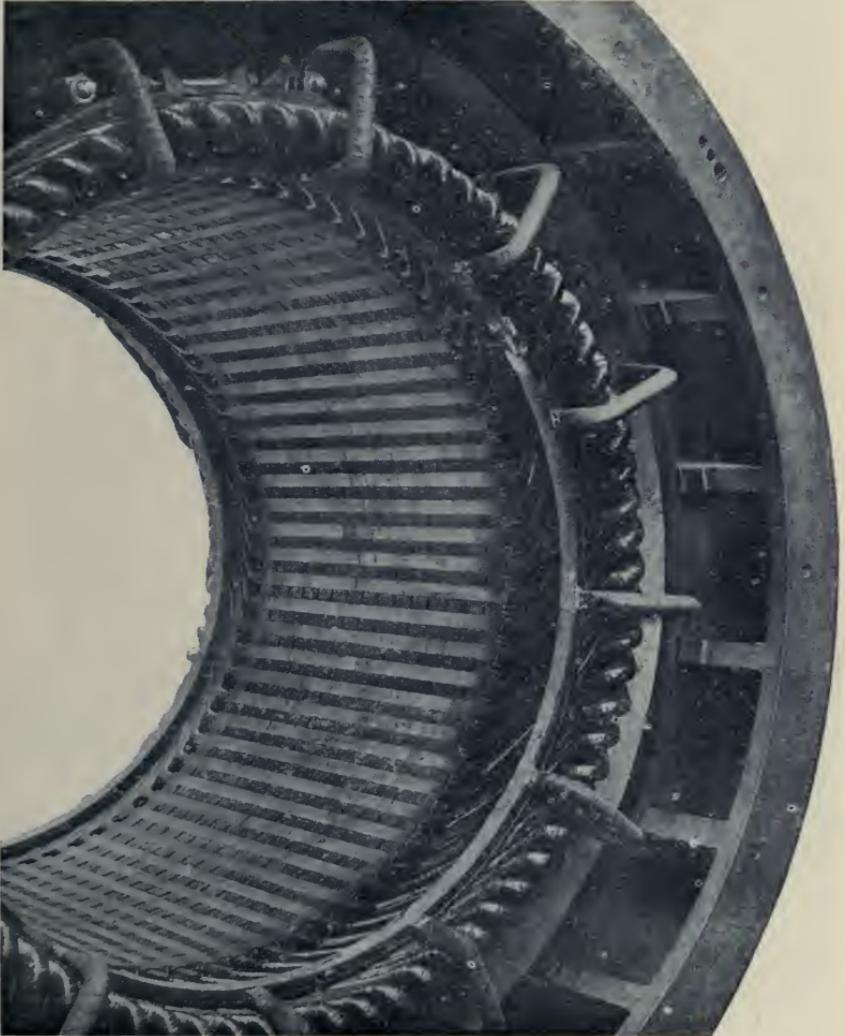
End view of armature of 3000-kw. turbo-alternator
